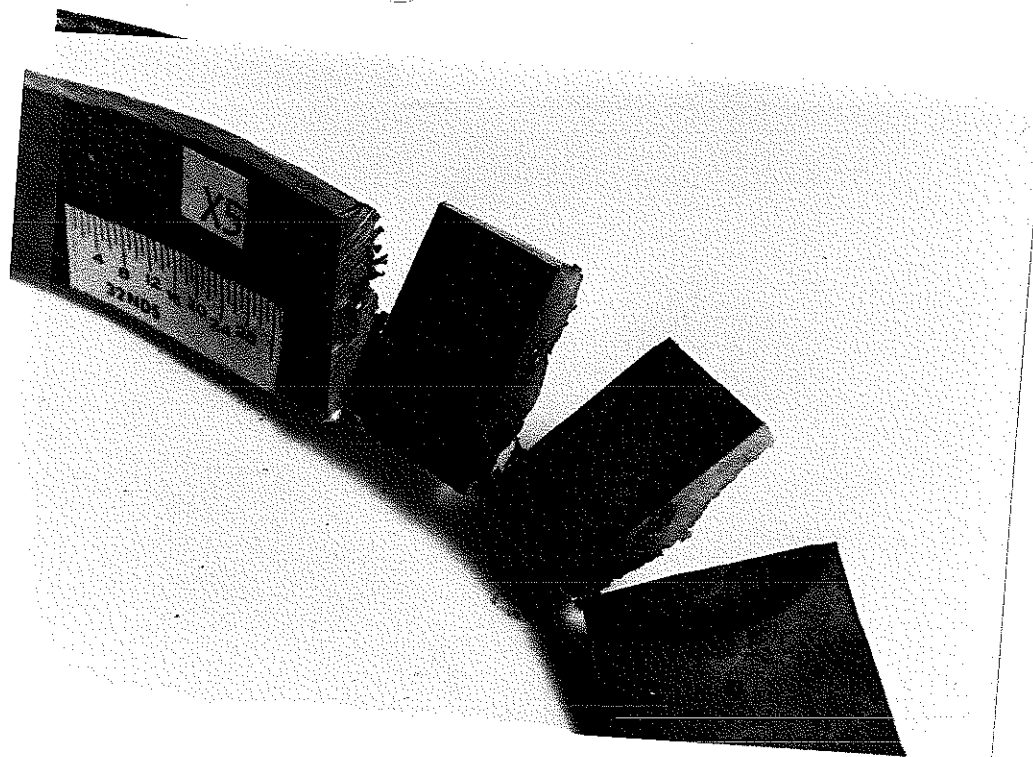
Cross-section of weld through pits shown in figure 6.
